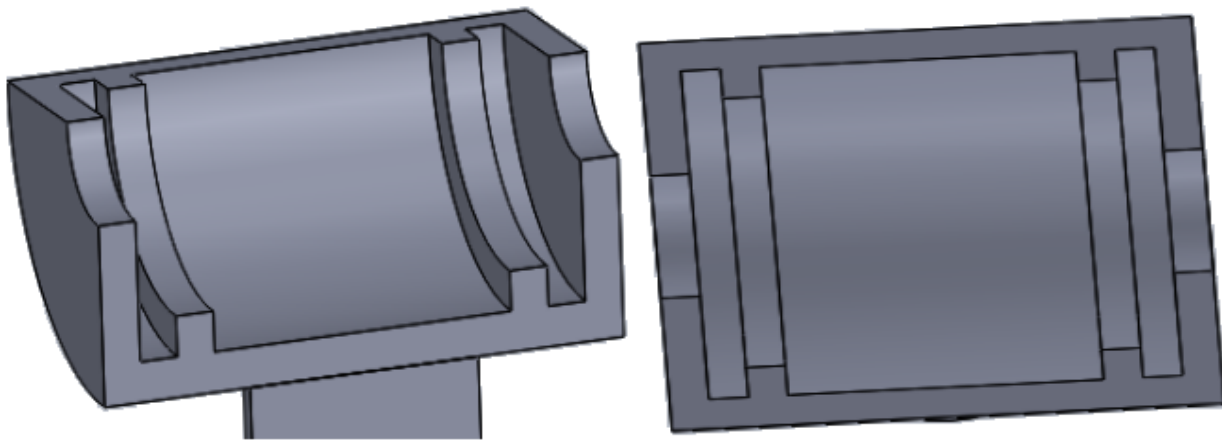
CAD drawing of the third design of bearing housing and oil tank
